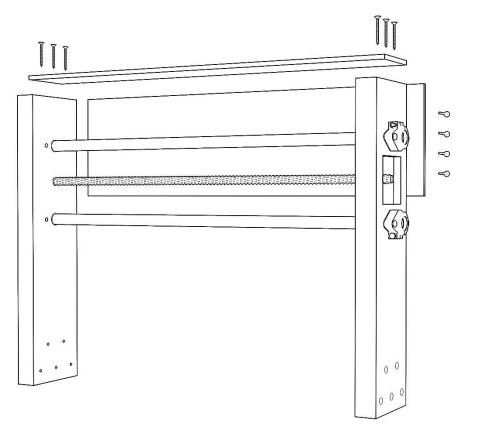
(MOUNTING ENCLOSURE FOR THE Z ANX X AXIS)
